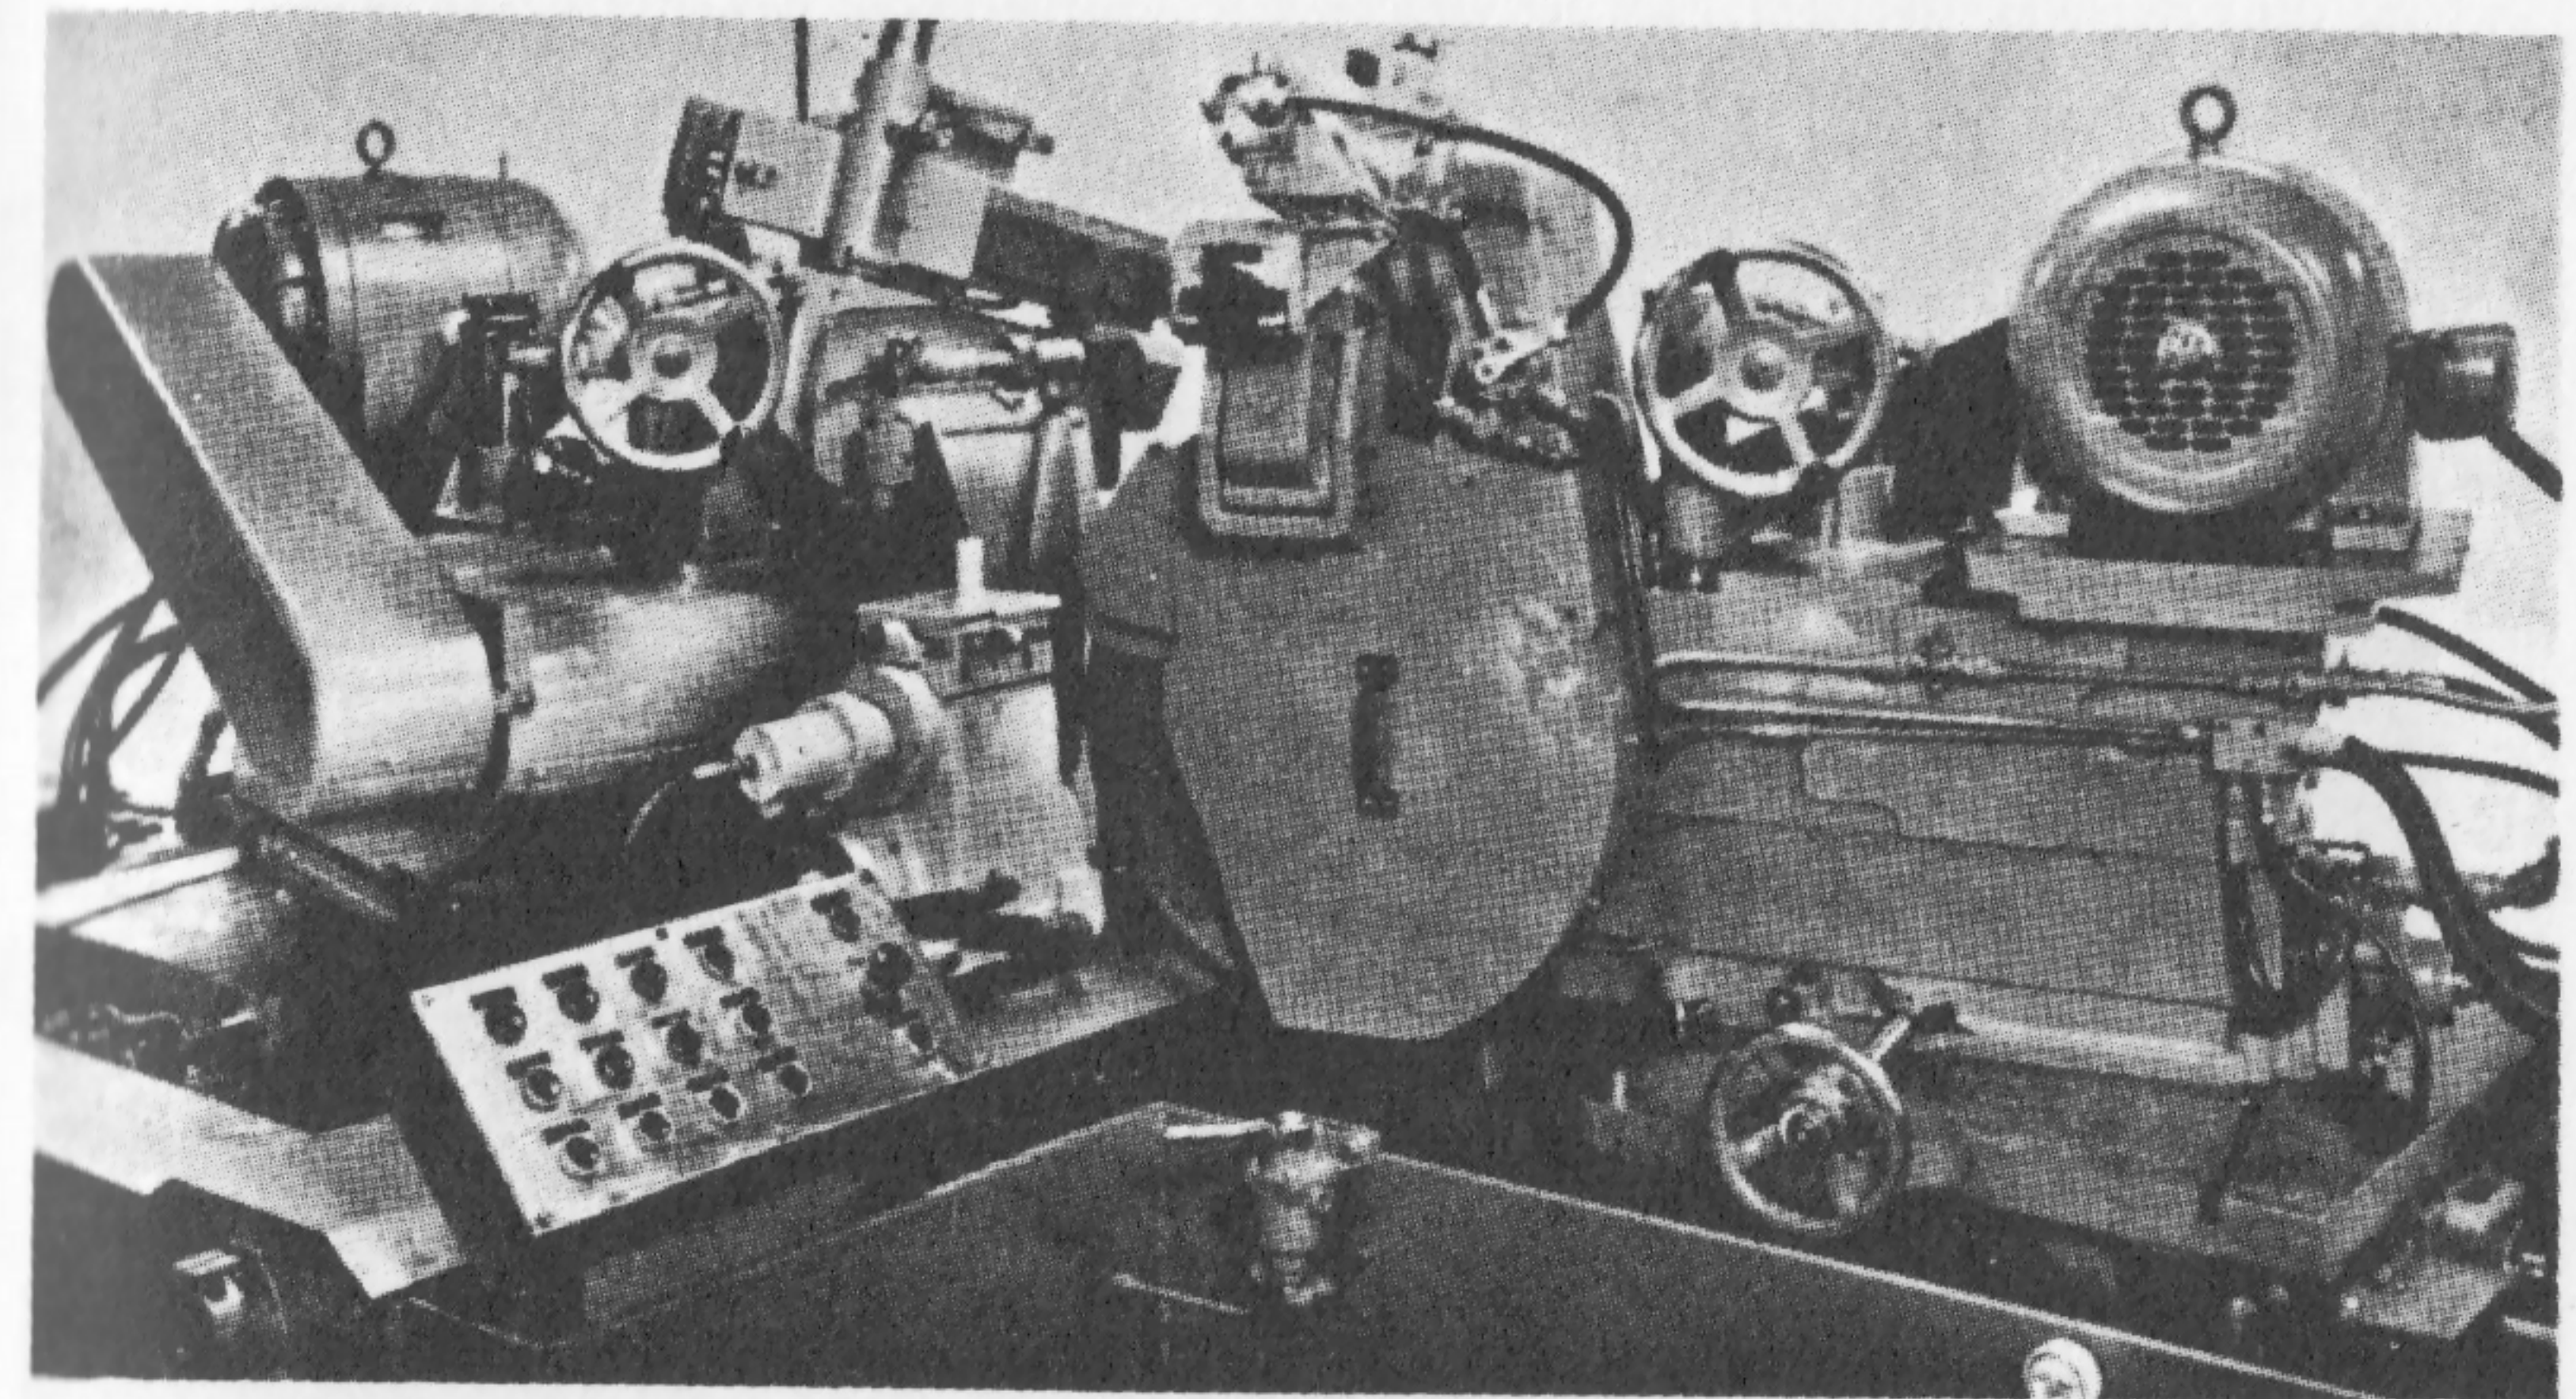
GRINDING MACHINE FOR FINISHING JET BLADES (Lewis)
